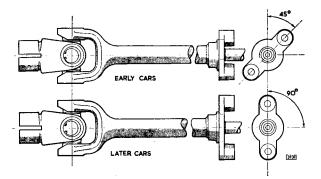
Showing the 45° and 90° phased lower steering columns
